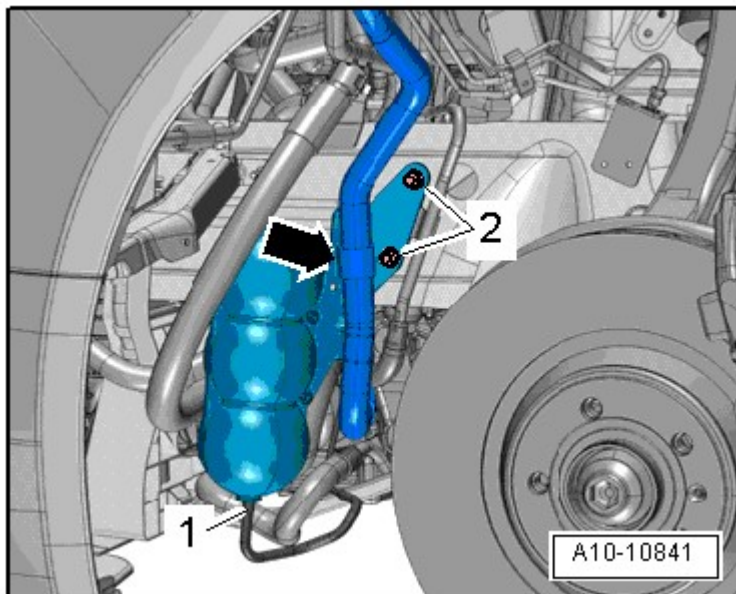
Disconnecting Vacuum Hose & Lay Hydraulic Oil Hose To Side
